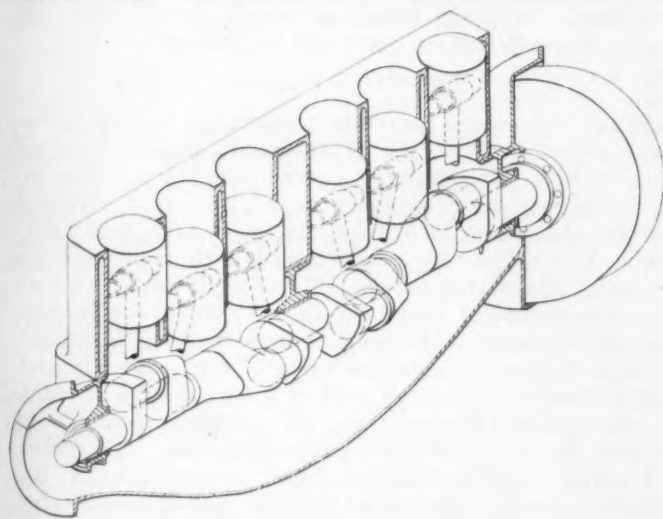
SIX-CYLINDER THREE-BEARING ENGINE
